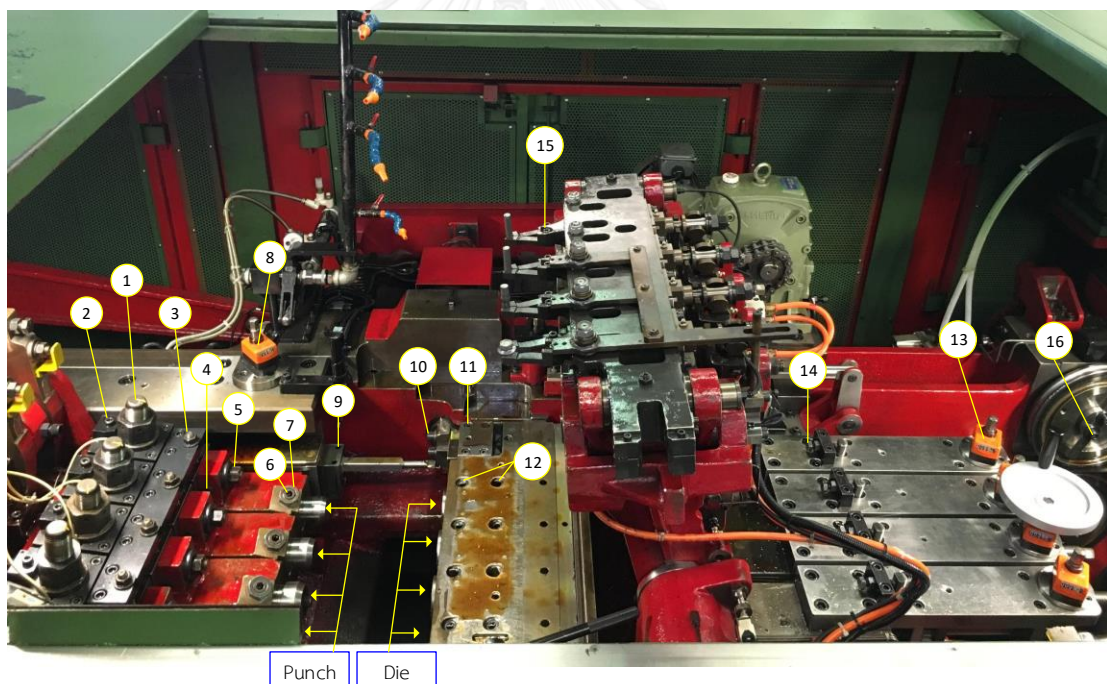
Adjustments and locks parts use during bolt forming setup operation
